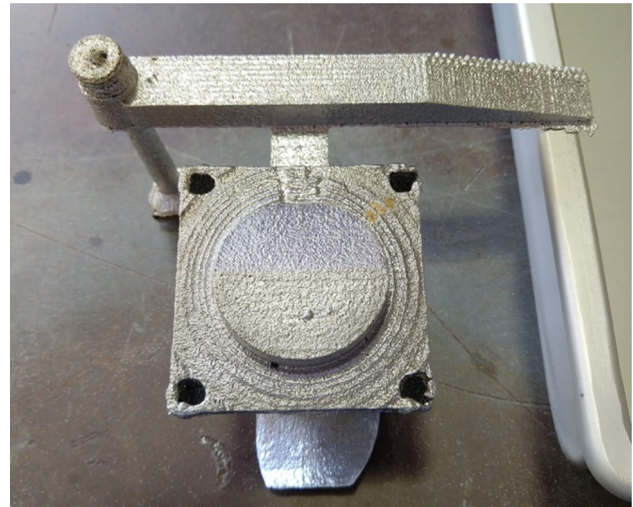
Test casting made with SPD 3D printed sand mold. Note the grooves around the central cylindrical feature and the incomplete holes in the corners.
